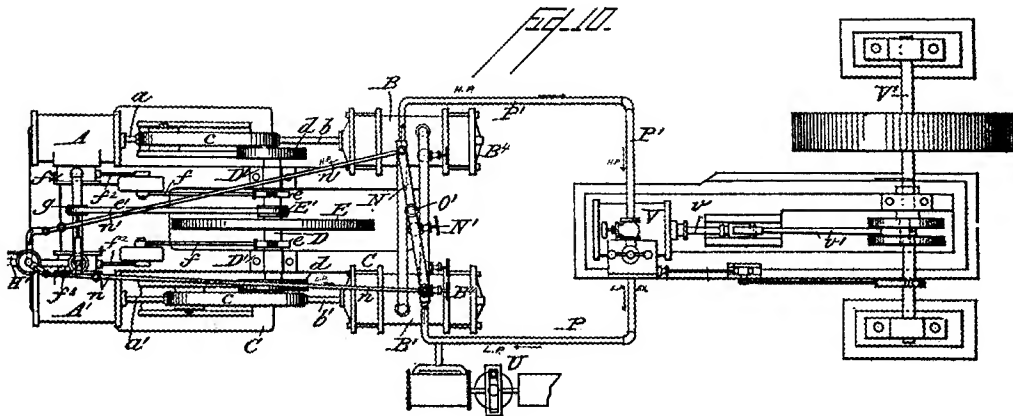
Plan view of apparatus on a diminished scale, with example of driven machinery.
